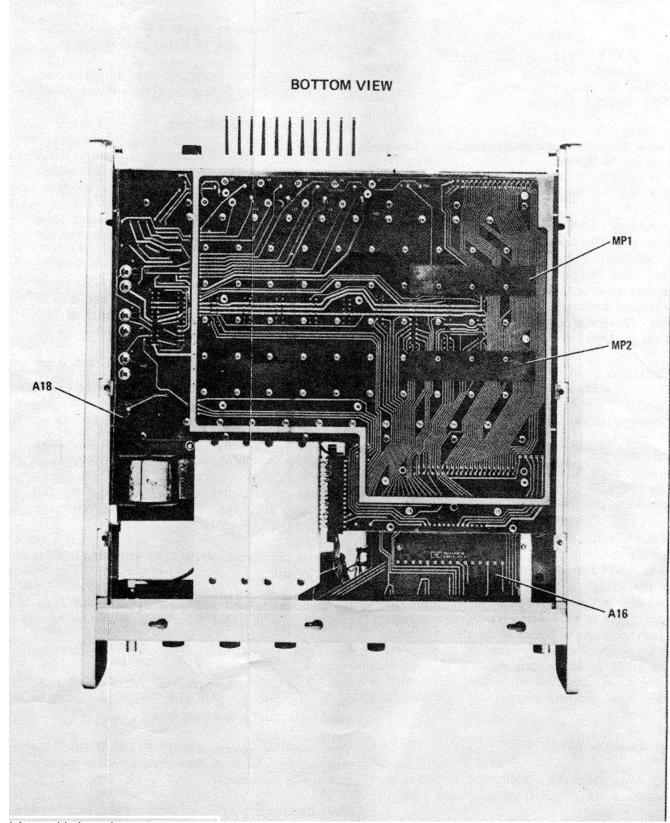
Chassis Mounted Parts and Assembly Locations
